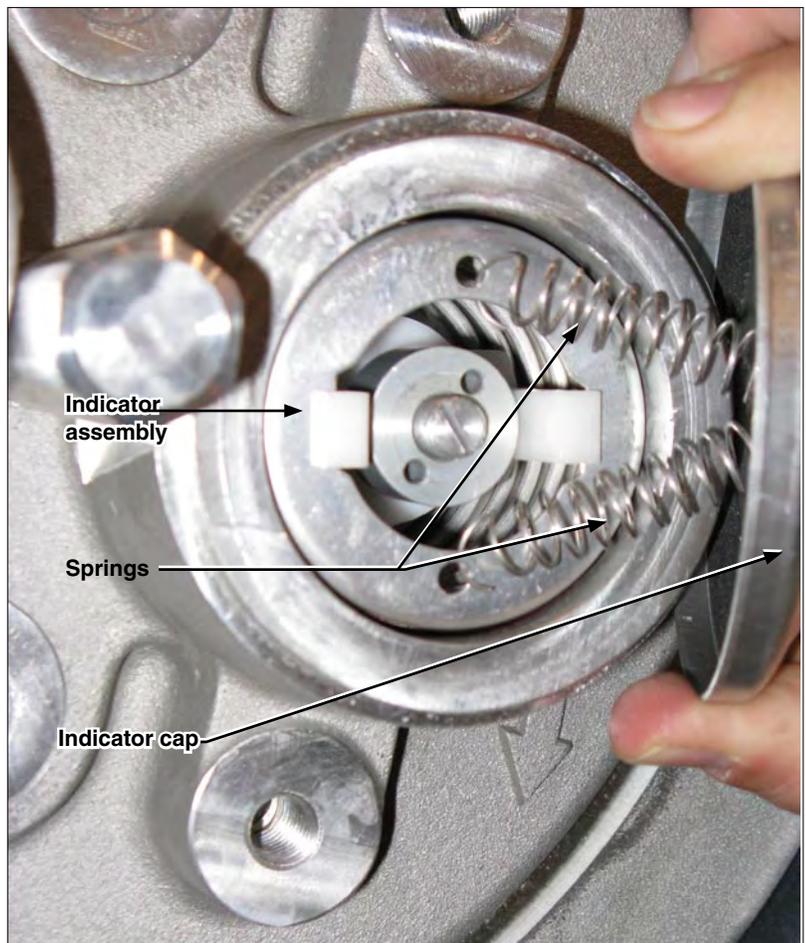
Gas pressure indicator with cap raised to show target assembly.
